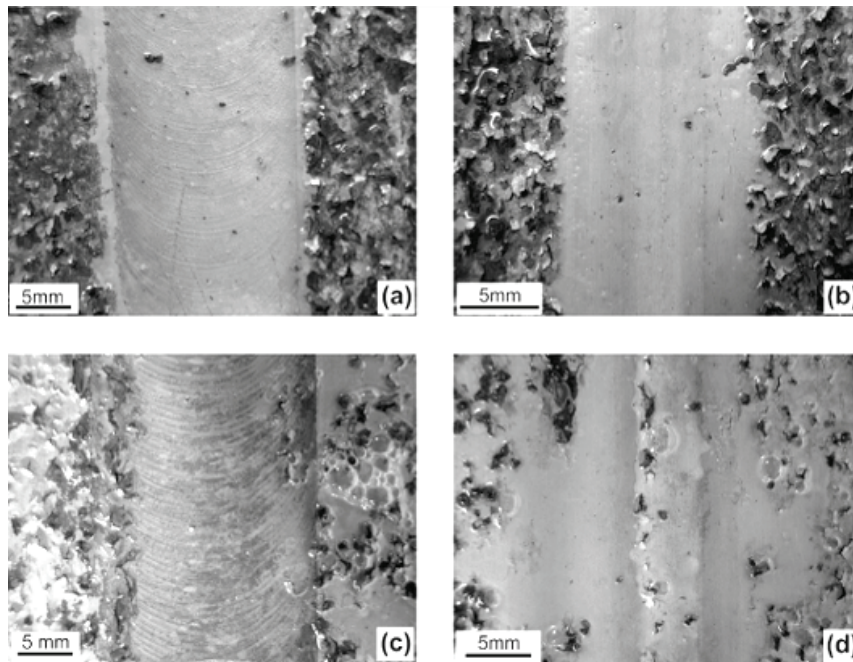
Surface appearance of FSW panels in the weld region after 96 h exposure to the EXCO solution: (a) FSW 6056-T6 face side, (b) FSW 6056-T6 root side (c) FSW 6056-T7X face side and (d) FSW 6056-T7X root side
